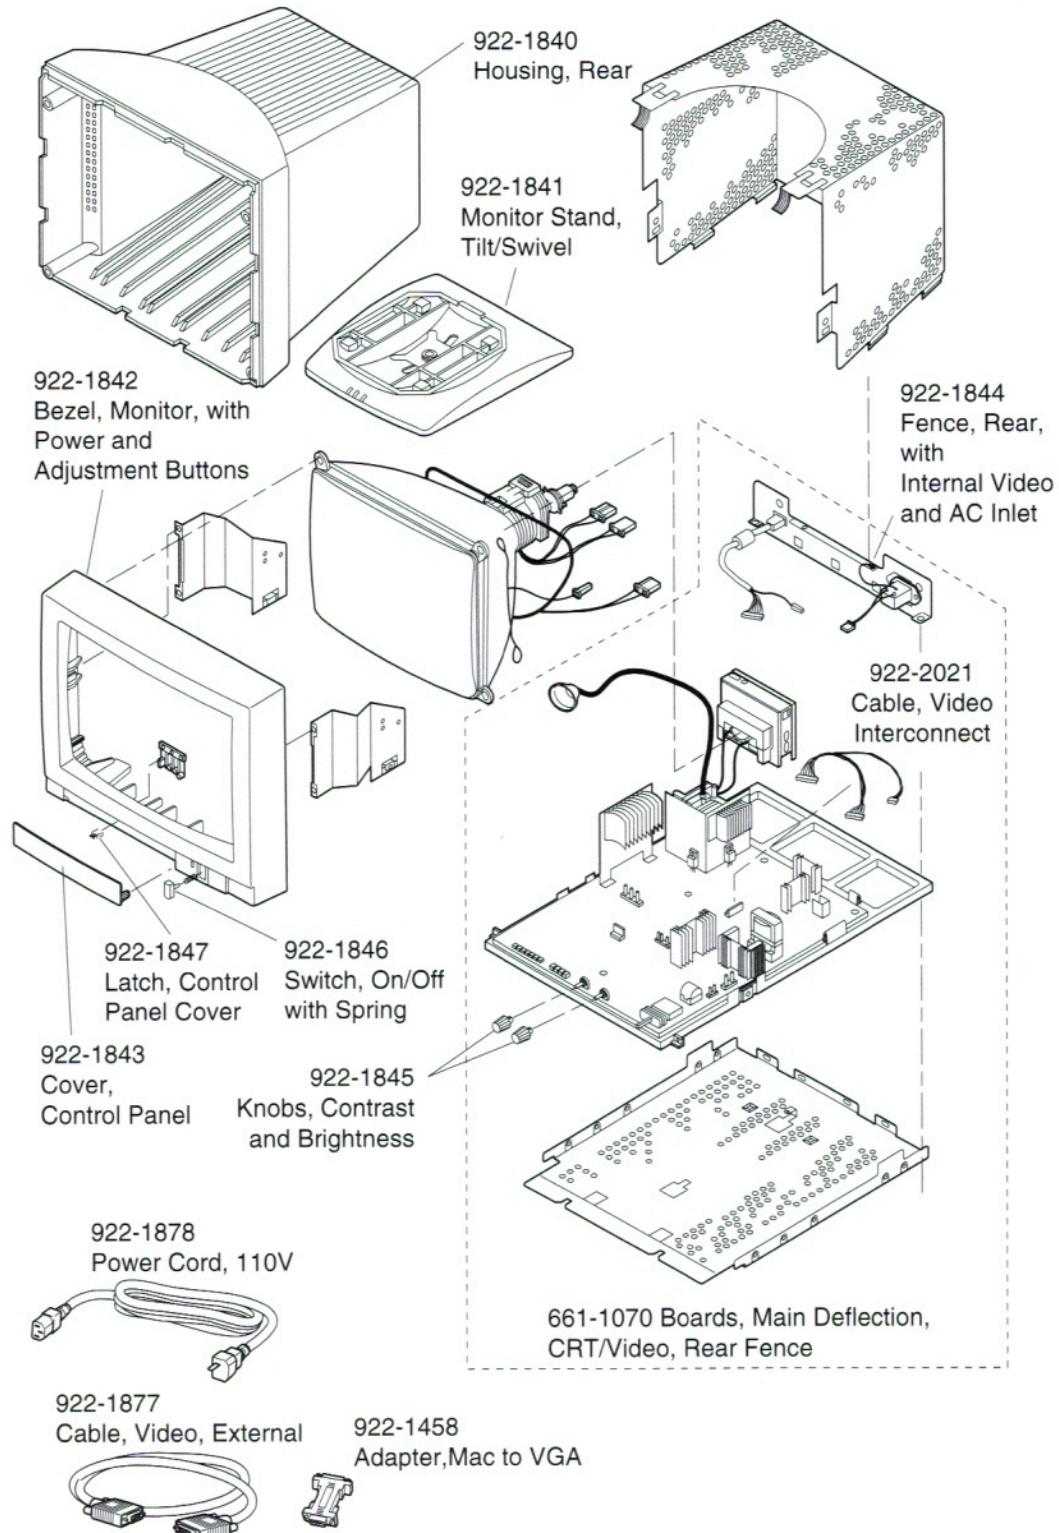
Apple Multiple Scan 1705 Display Exploded View
